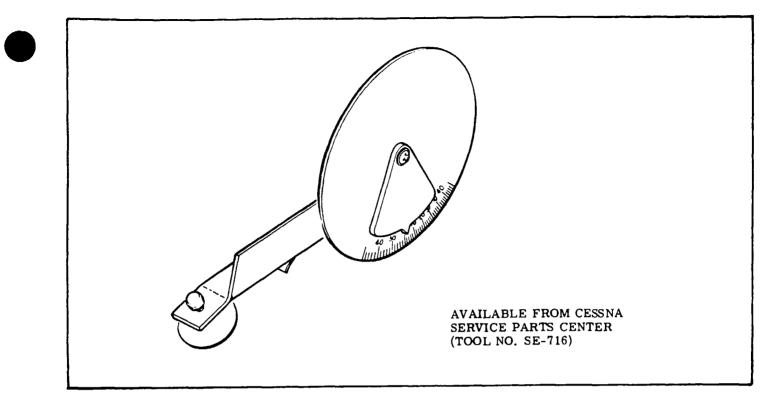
Inclinometer for Measuring Control Surface Travels
